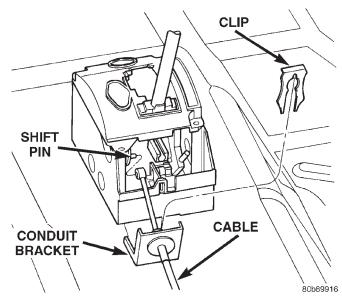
Gearshift Cable at Floor Shifter Assembly
